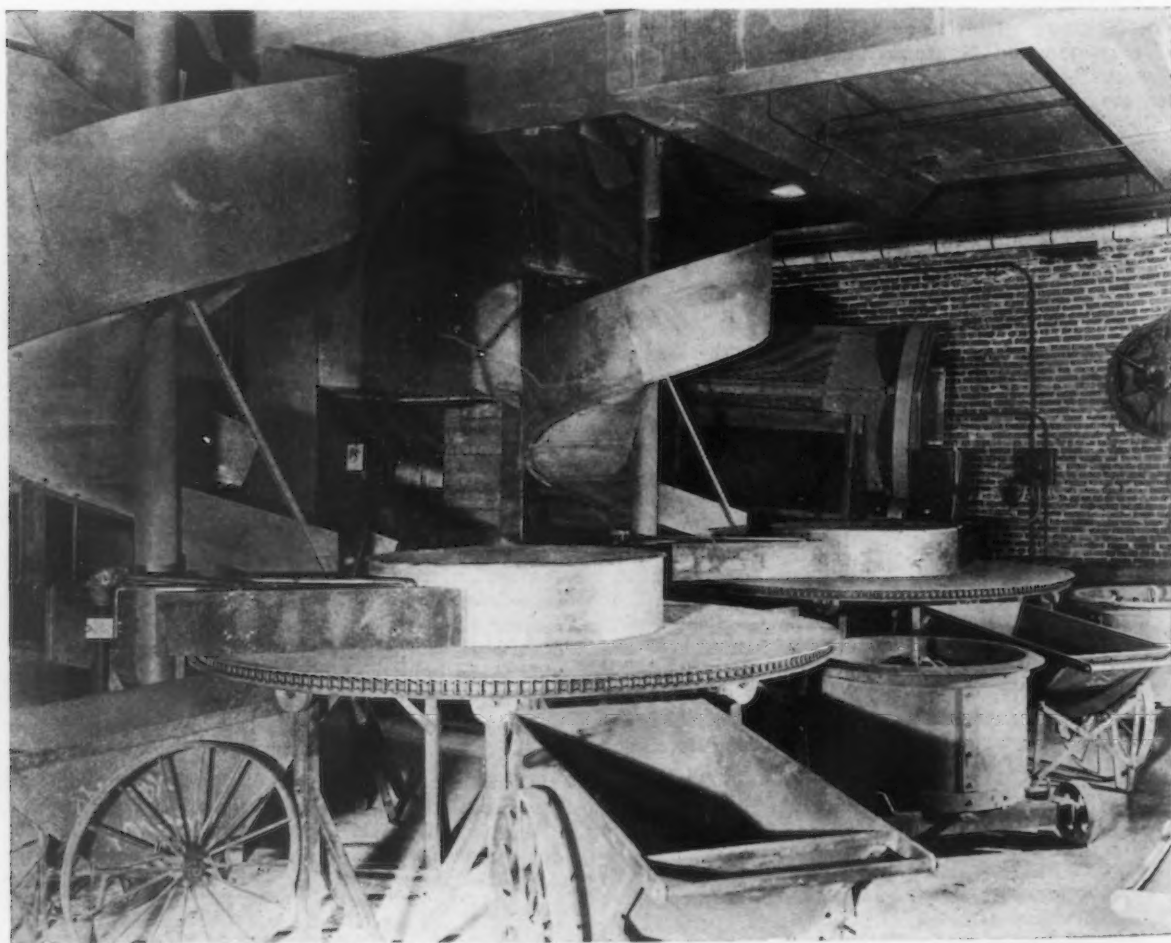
Spiral Castings Chutes and Sorting Tables. Castings from the floor above land on the circular sorting tables. The sprue is knocked off and thrown into the sprue bucket and the castings into two-wheeled carts, from which they are dumped into tumbling barrels
